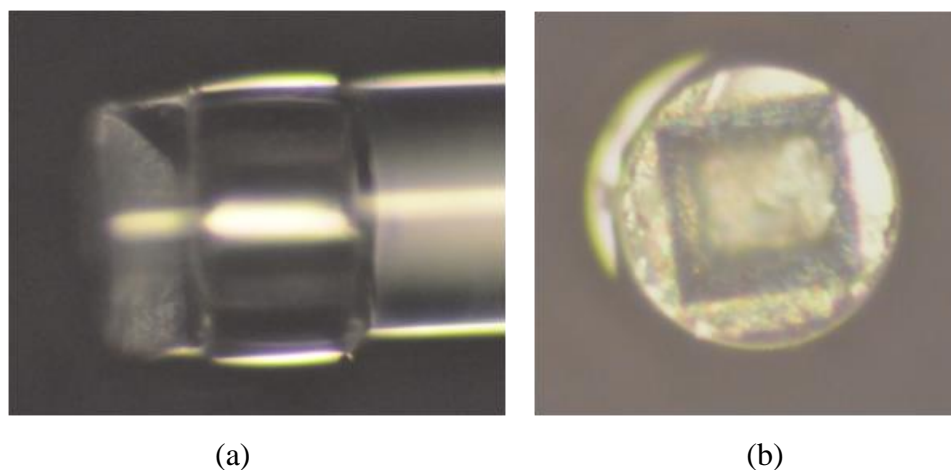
Microscopic images of cone shape hole (a) lateral view (b) top view
